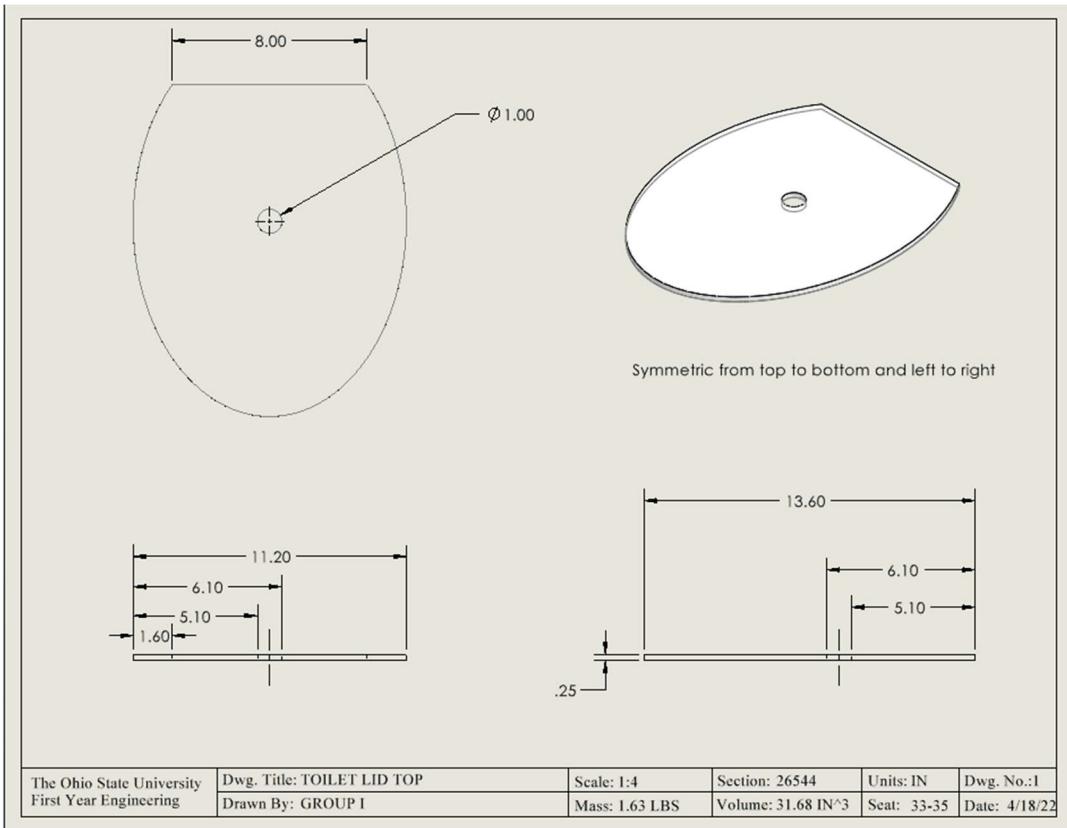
Detailed drawing of the lid for the prototype. It has a hole for the button used to turn the LED lights on.
